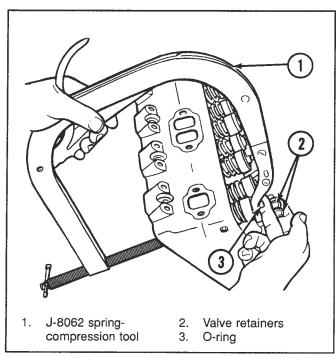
Compressing Valve Spring With Cylinder Head Removed
